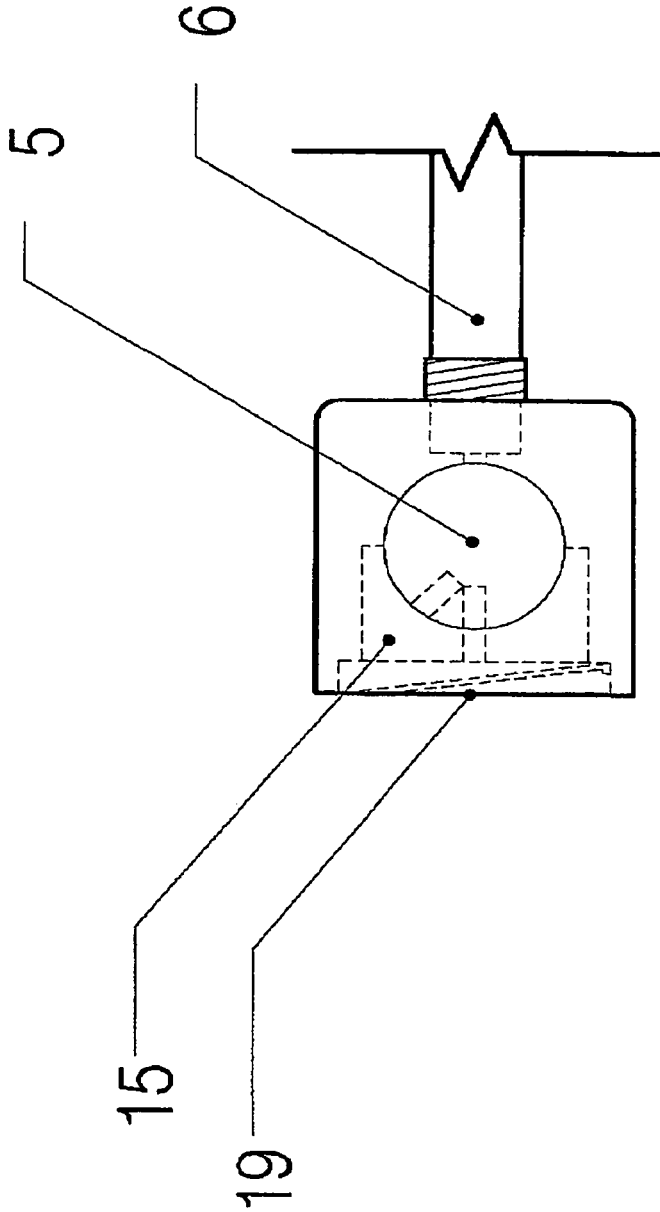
Handheld retractable nozzle side view of 3-way ball valve assembly
